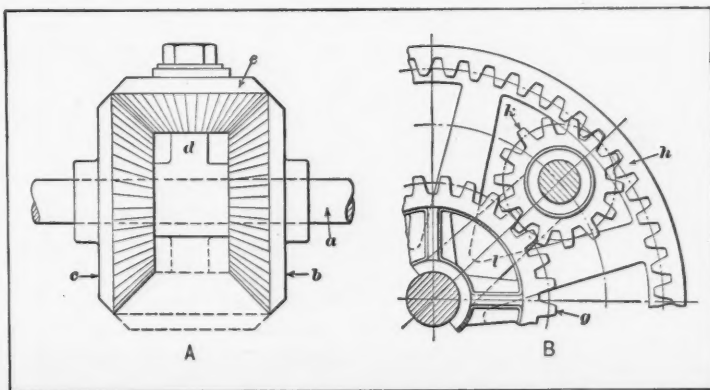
Planetary Trains of Bevel and Spur Gearing
